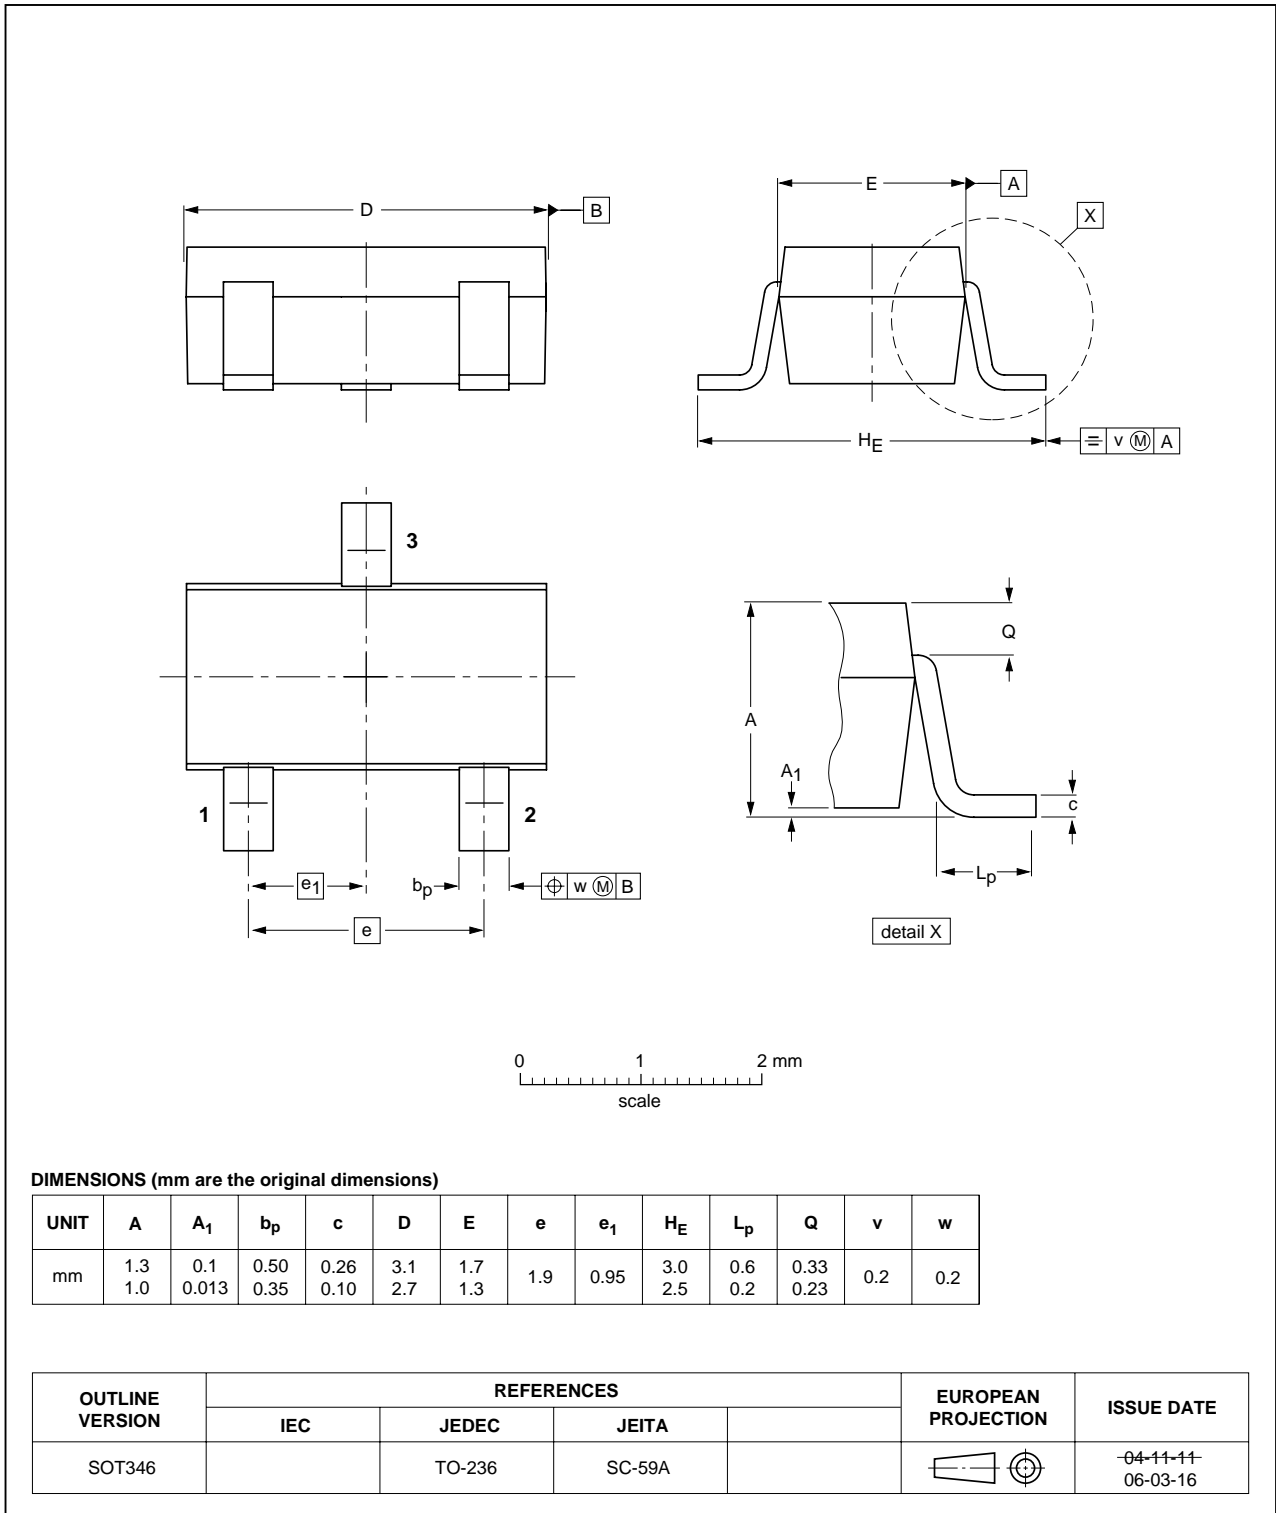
Package outline SOT346 (SC-59A/TO-236)
